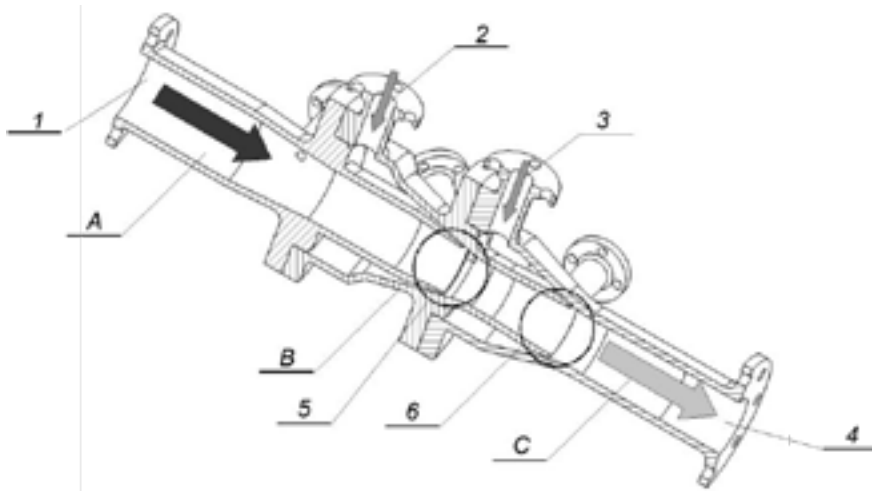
Jet pump cross section: A,B,C – pump components, 1 – pump suction port, 2 – inlet to 1st motive nozzle, 3 – inlet to 2nd motive nozzle, 4 – pump outlet, p1,p2,p3,p4,p5,p6 – ports for pressure transducers, 5,6 – motive nozzles
